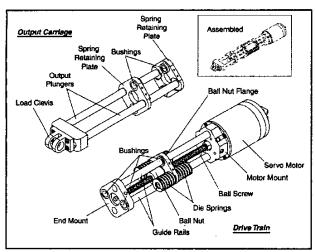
Exploded view of a Series Elastic Actuator. A brushless DC servo motor drives a ballscrew. The ball nut flange pushes against 4 die compression springs. These springs then push against 2 spring retaining plates are are clamped to two output plungers. A linear potentiometer measures the spring deflection.
